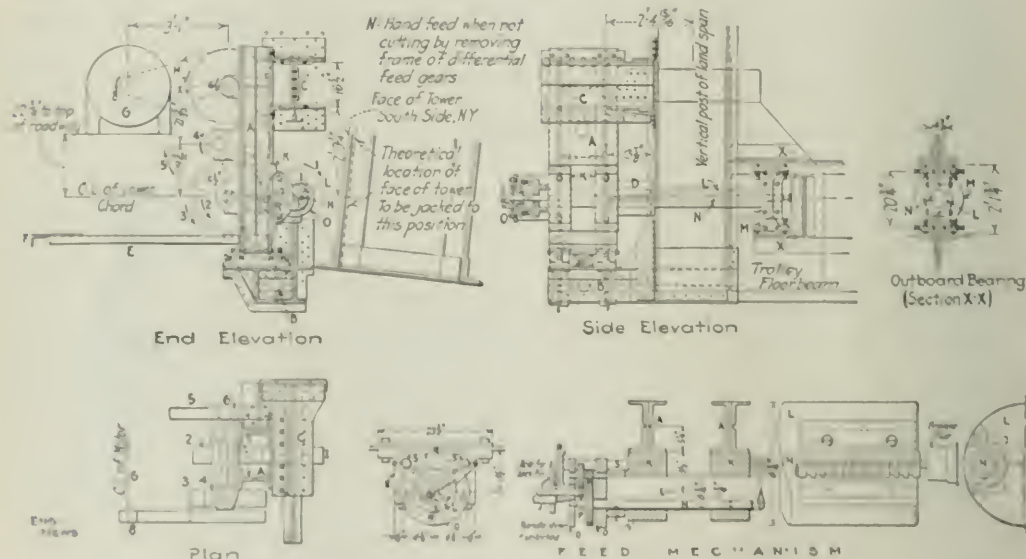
SPECIAL PIN-HOLE BURNING MACHINE
